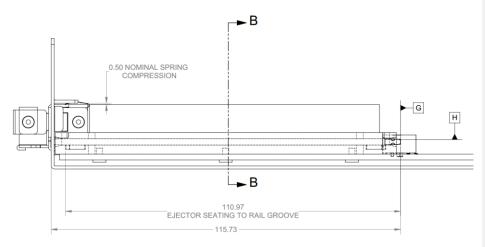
Small Form Factor Baseboard Chassis to Ejector lever Card CTF Dimensions (Side View)
